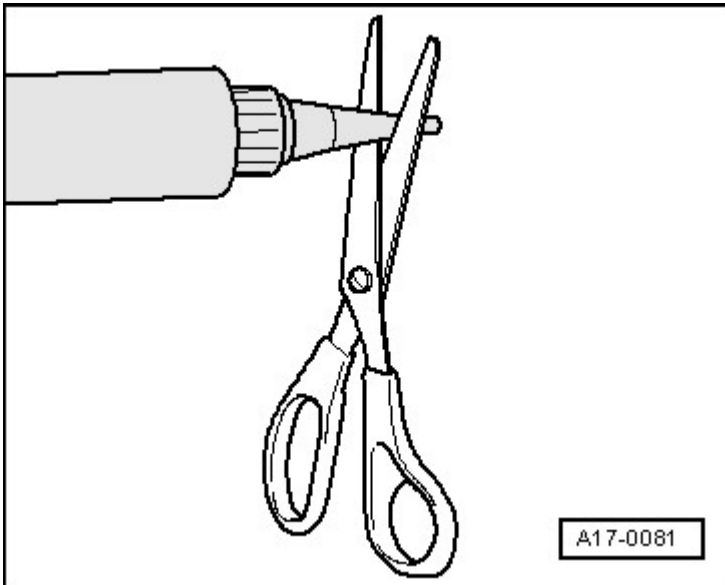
Cutting Tube Nozzle At Front Marking (Nozzle Diameter Approx. 2 mm)
